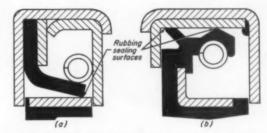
Shaft or bore smoothness and hardness are not critical with these internal and external seals. Rubbing surface is part of the seal assembly. External type, b, is dual unit.
